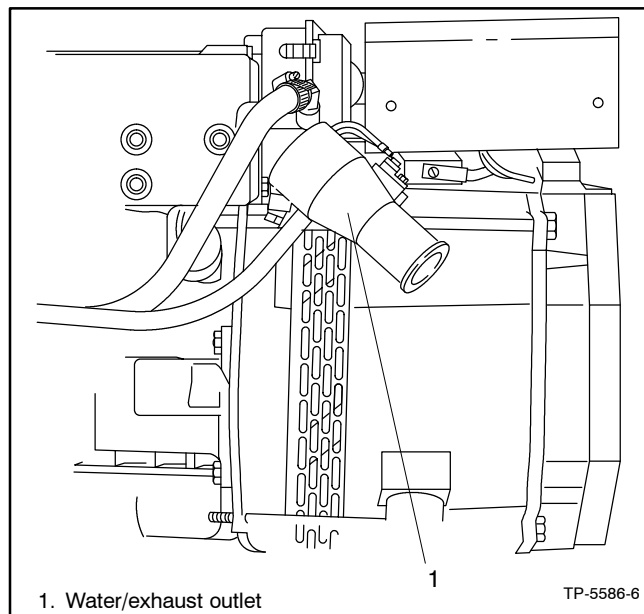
Mixer Elbow/Exhaust Connection, Typical
